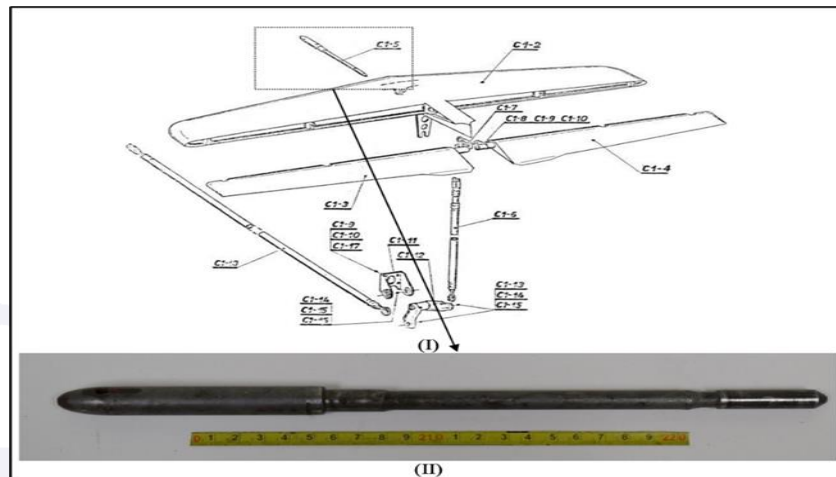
In (I) scheme of the bolt assembly next to the elevator stabilizer and in (II) the bolt of the crashed aircraft.
